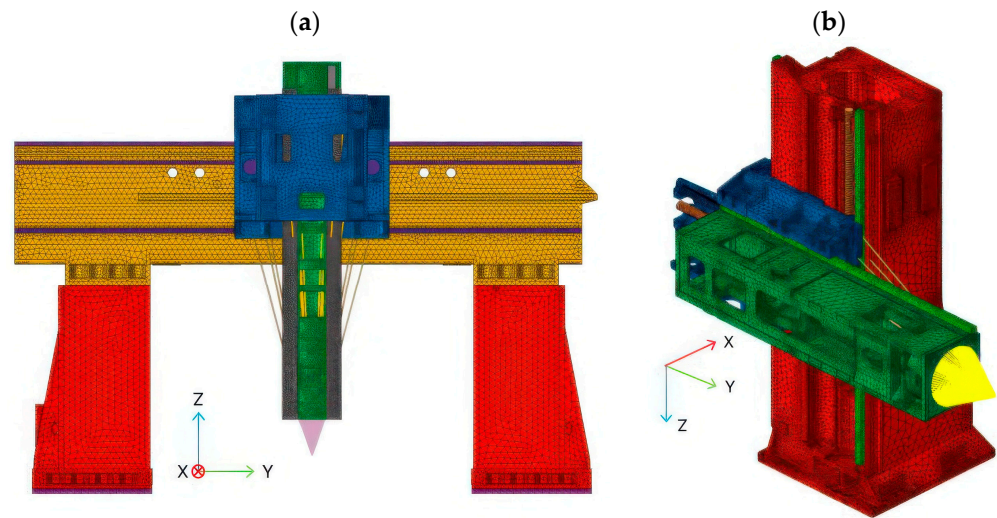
Machine tool FEMs: (a) THERA™ machine and (b) ZERO™ machine.
